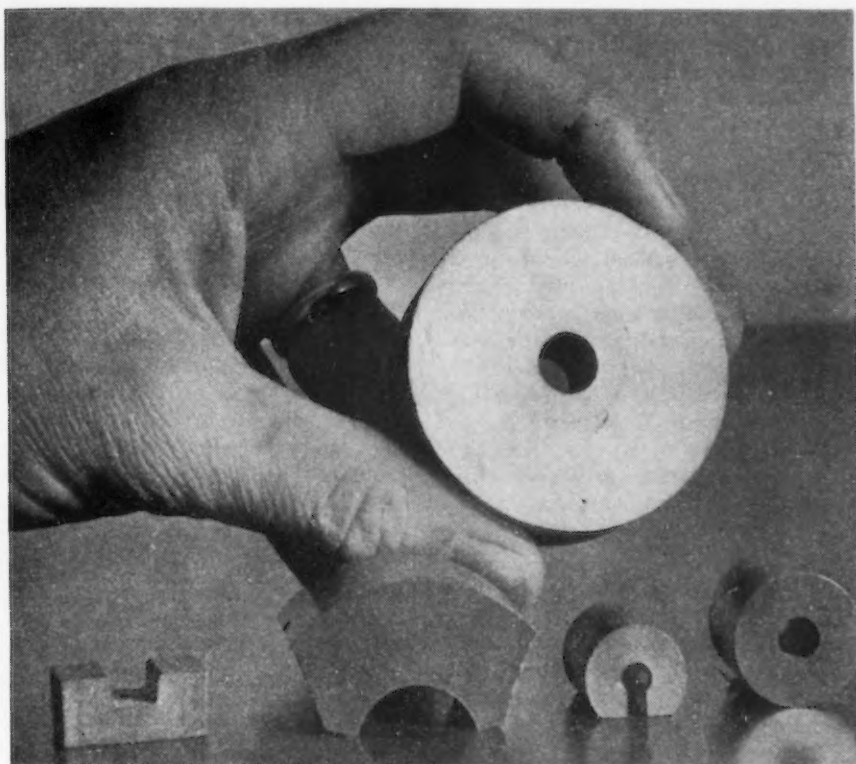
Sintered Alnico magnets of a larger type, formed in automatic mechanical and hydraulic presses.
